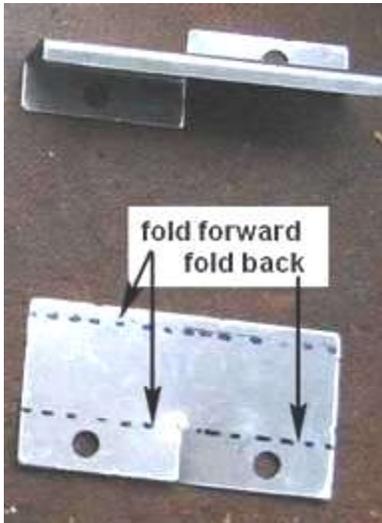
Impeller blade made from sheet metal, 18 gauge (.048 in, 1.2 mm) or thicker.
